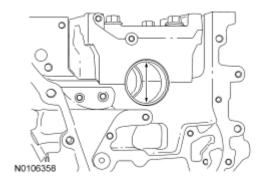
Identifying Crankshaft Block Main Bearing Bore Diameter
